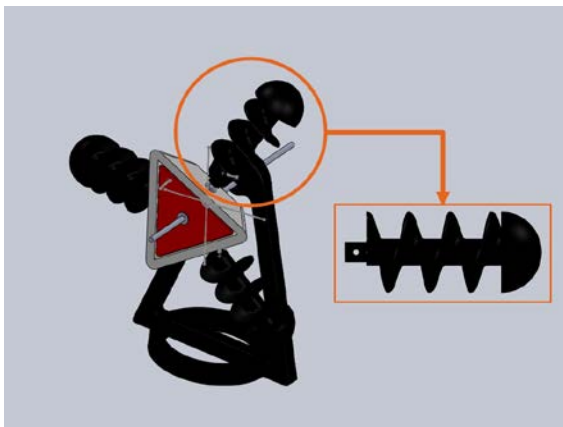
Design of spiral Magnus wind turbine by 3D-CAD
